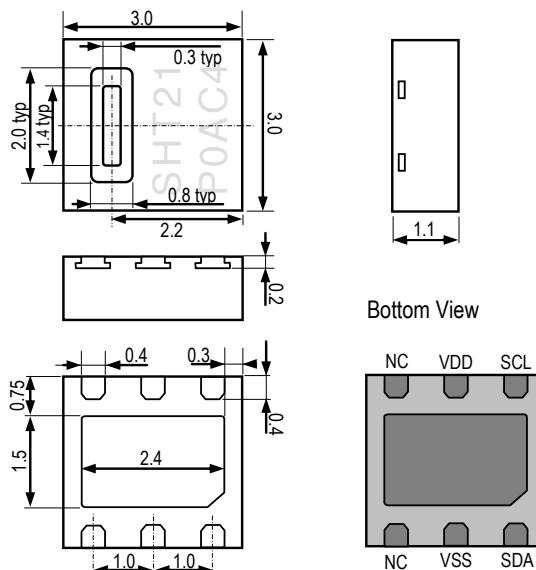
Drawing of SHT21P sensor package, dimensions are given in mm (1mm = 0.039inch), tolerances are $\pm 0.1\text{mm}$. The die pad (center pad) is internally connected to VSS. The NC pads must be left floating. Numbering of E/O pads starts at lower right corner (indicated by notch in die pad) and goes clockwise (compare Table 2).
